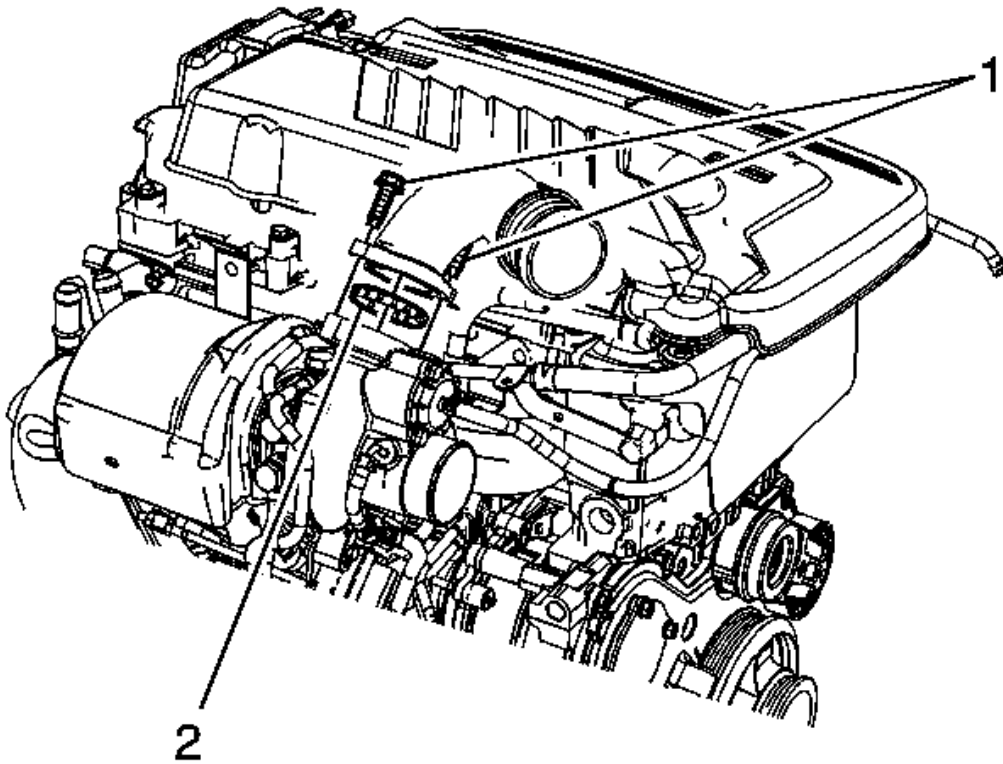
Identifying Charge Air Cooler Pipe & Gasket
